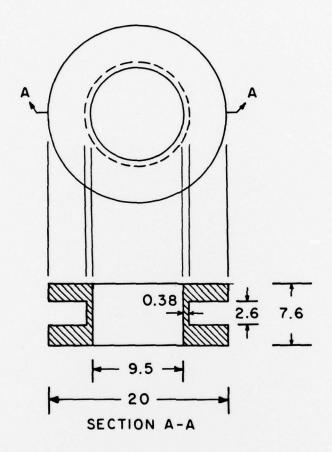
DETAILS OF TORSIONAL SPECIMEN WITH INTEGRAL MOUNTING FLANGES. DIMENSIONS ARE IN MILLI-METERS.
